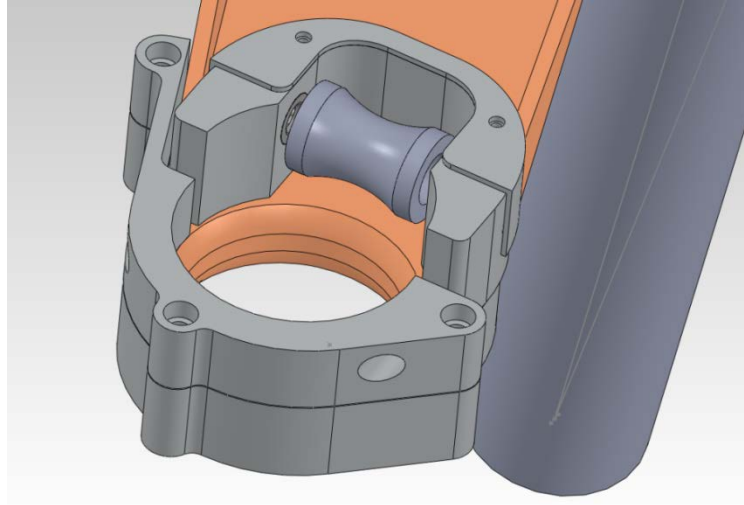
Larger Roller in AVASS Roller Bearing Design for Top Brackets V2.0 Top Angle
